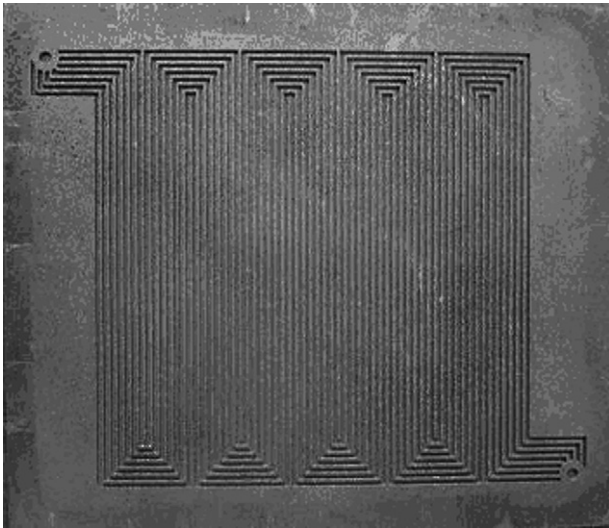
One side of a laminate polymer composite bipolar plate showing the 7-channel parallel serpentine style design. Plate dimensions are 4.75 in. \times 5.5 in. Channel dimensions are 0.8 mm \times 0.8 mm.
